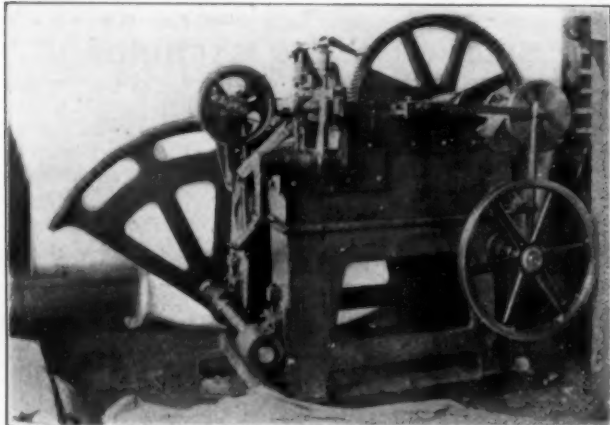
BAIRD SPRING WINDING AND CUTTING MACHINE.
